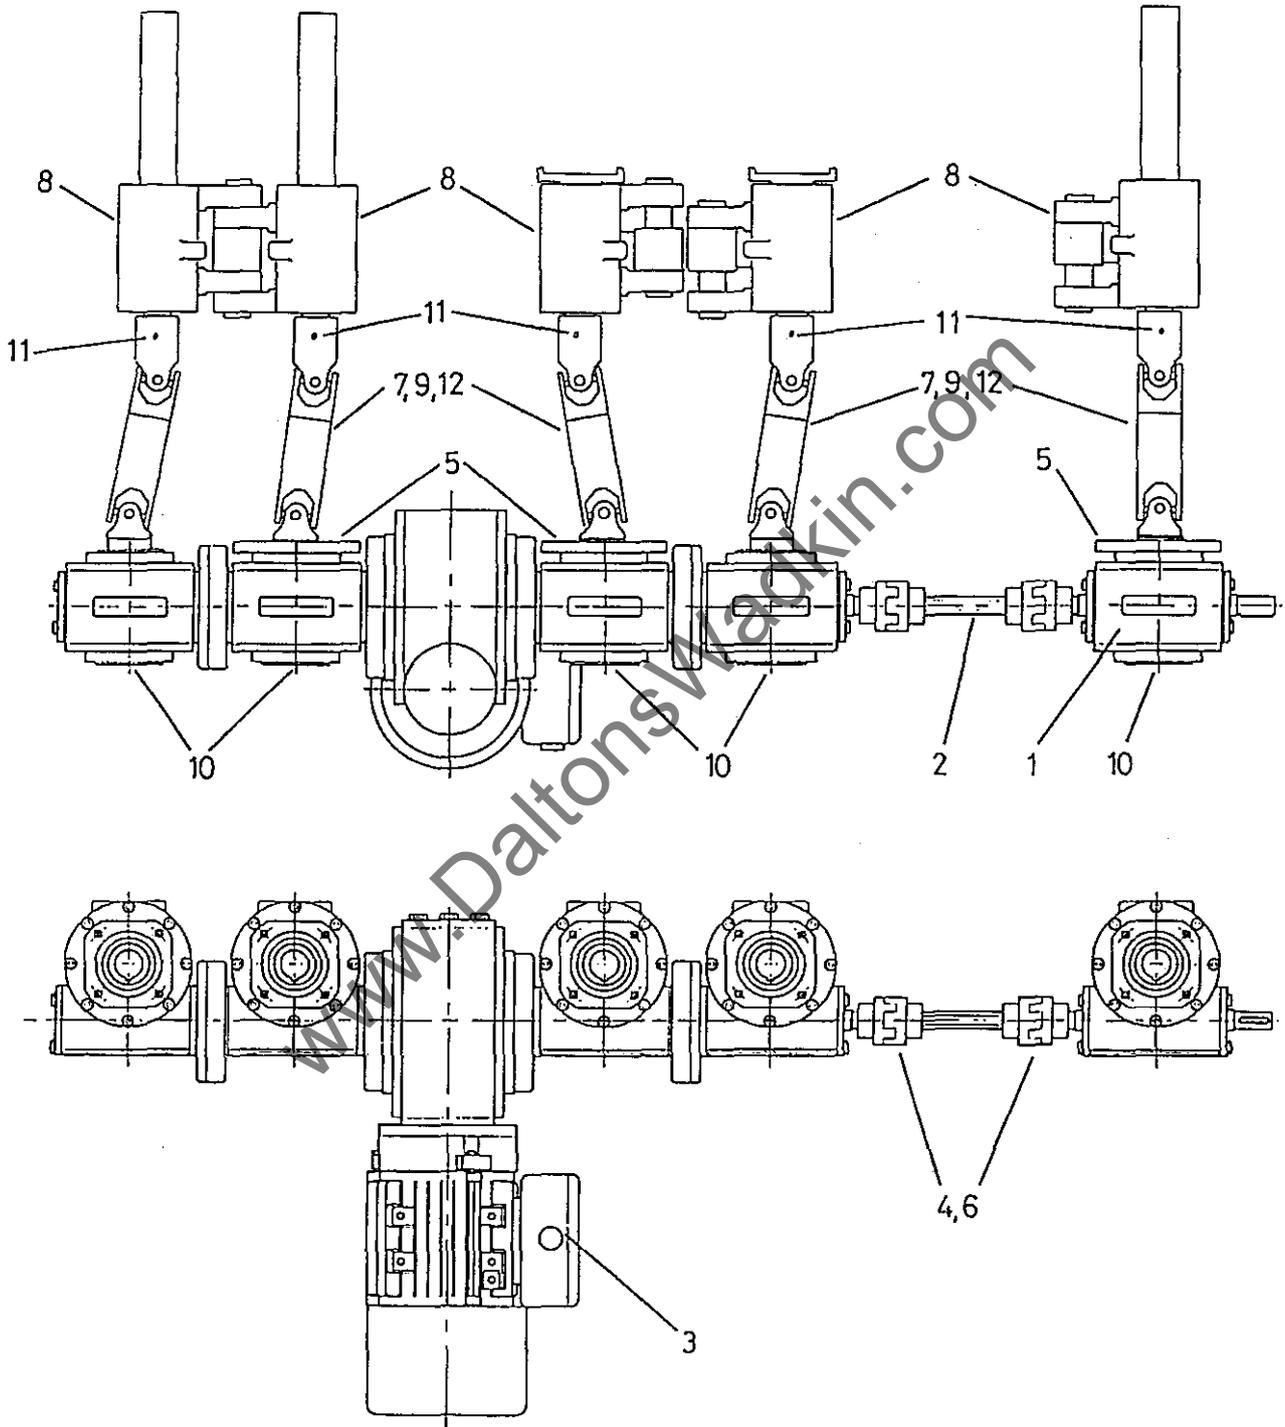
GEARBOXES AND DRIVE SHAFTS (SINGLE SPEED)
